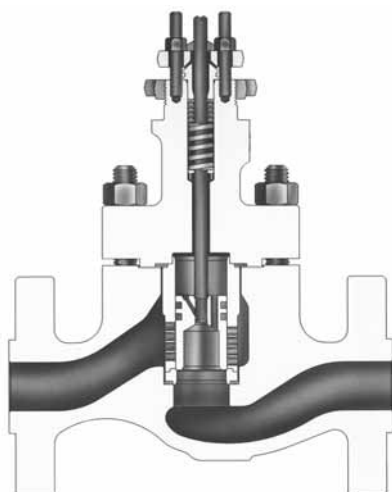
Design HPD Valve Assembly (NPS 2 to 6)
